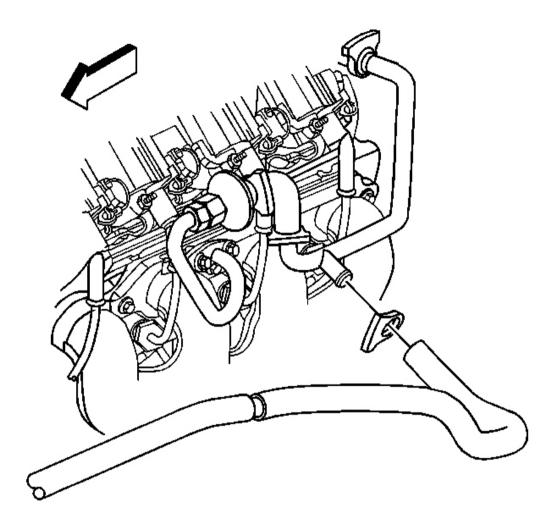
AIR Pipe Hose & Hose Clamp Courtesy of GENERAL MOTORS CORP.
